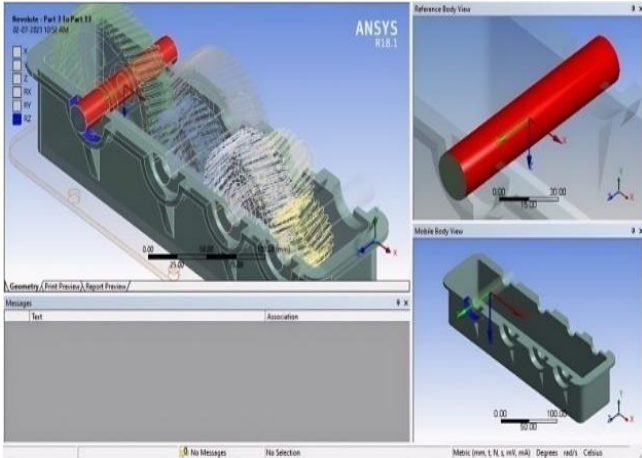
Defined interactions joints for load transfer in three stage helical gearbox assembly
